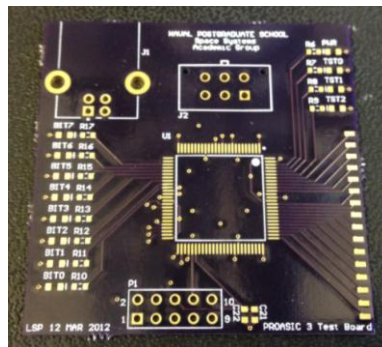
Manufactured four-layer PCB with gold surface pads and through-hole vias.
